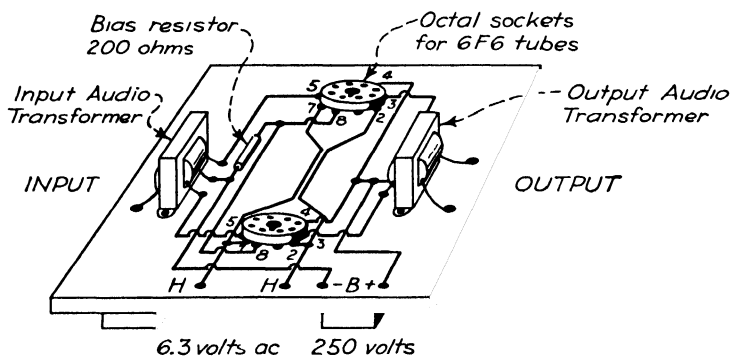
Lay out the parts for the push-pull amplifier as shown here.
